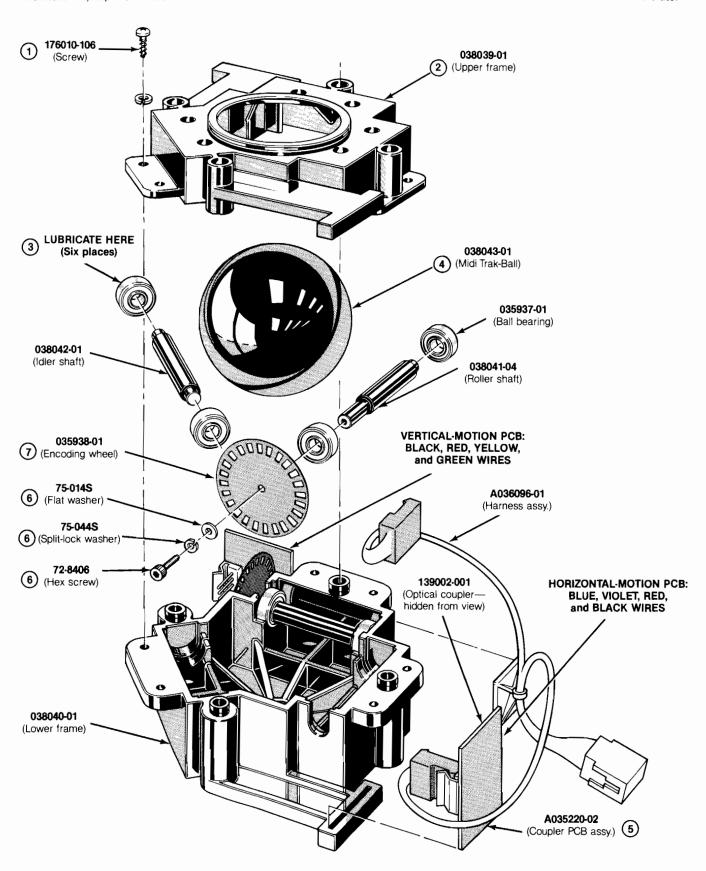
Midi Trak-Ball™ Assembly A038038-01 A
